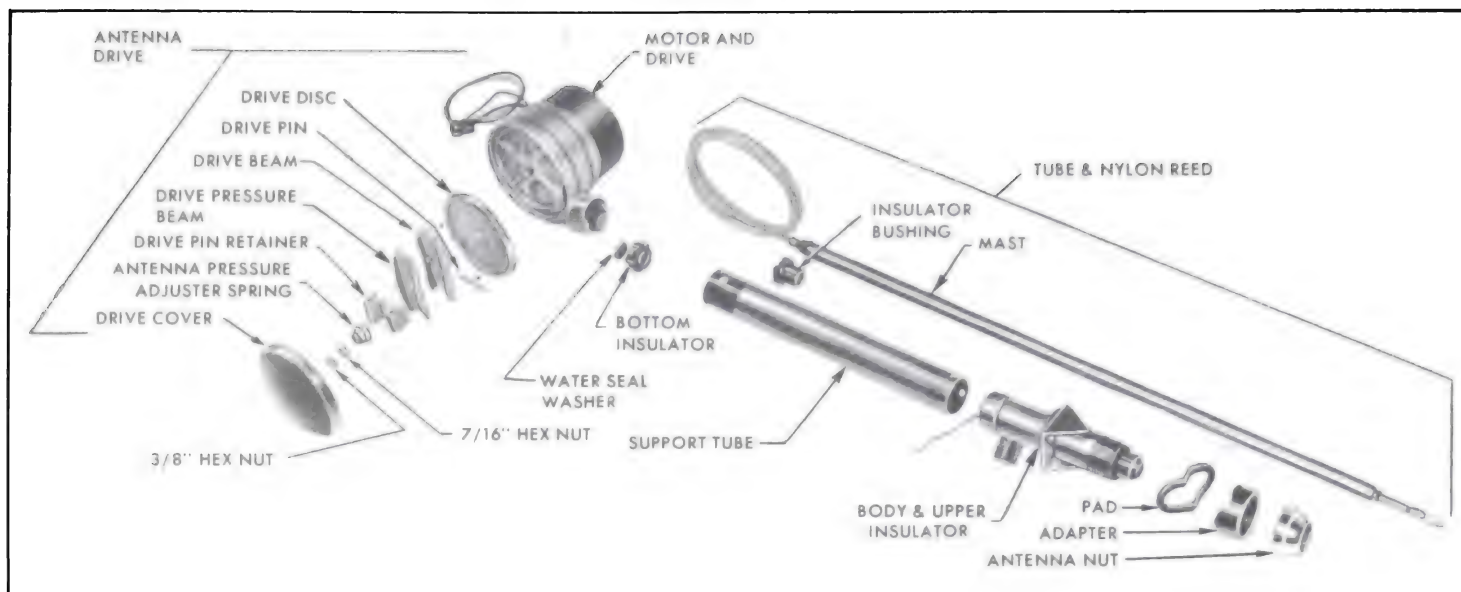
Electric Antenna (Exploded View) -4400, 4600 and 4800 Series
